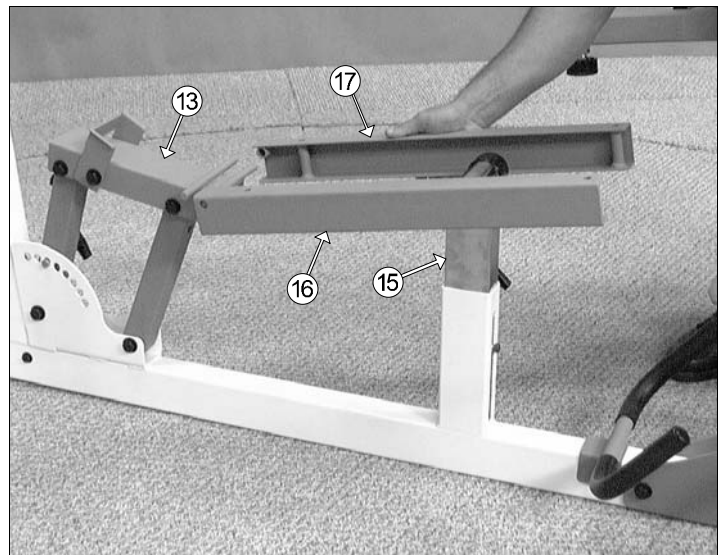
Connect the left and right Incline Bench Channels (#16, #17), in the position as shown above, to the Channel Seat Frame (#13) and the Incline Bench Elevation Tube (#15).
